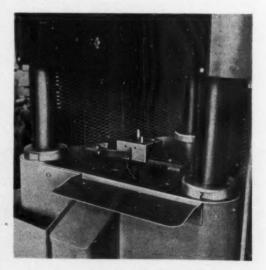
Close-up view of the lower die platen of the Trucast wax injection machine, with the bottom half of a die clamped in position. The lever seen projecting from the front of the die operates an ejector for removing the wax pattern
